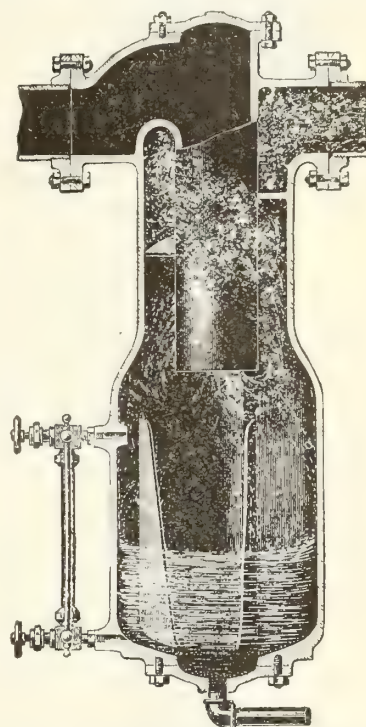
"STRATTON" CENTRIFUGAL SEPARATOR SHOWING INTERCEPTING VANES IN RECEIVER AND CENTRAL OUTLET PIPE.
